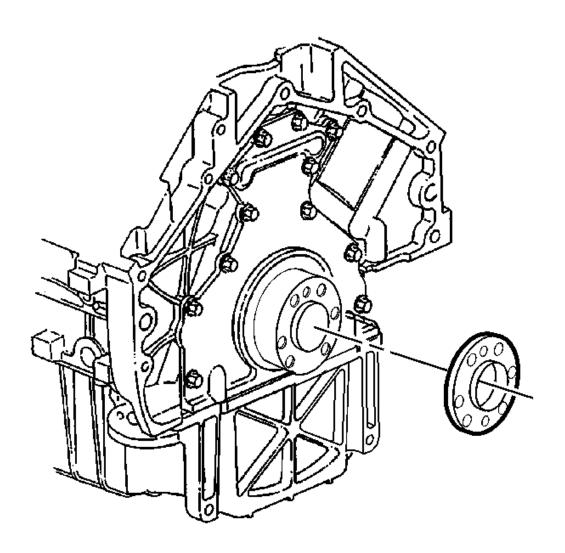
View Of Spacer & Crankshaft Rear Courtesy of GENERAL MOTORS CORP.
